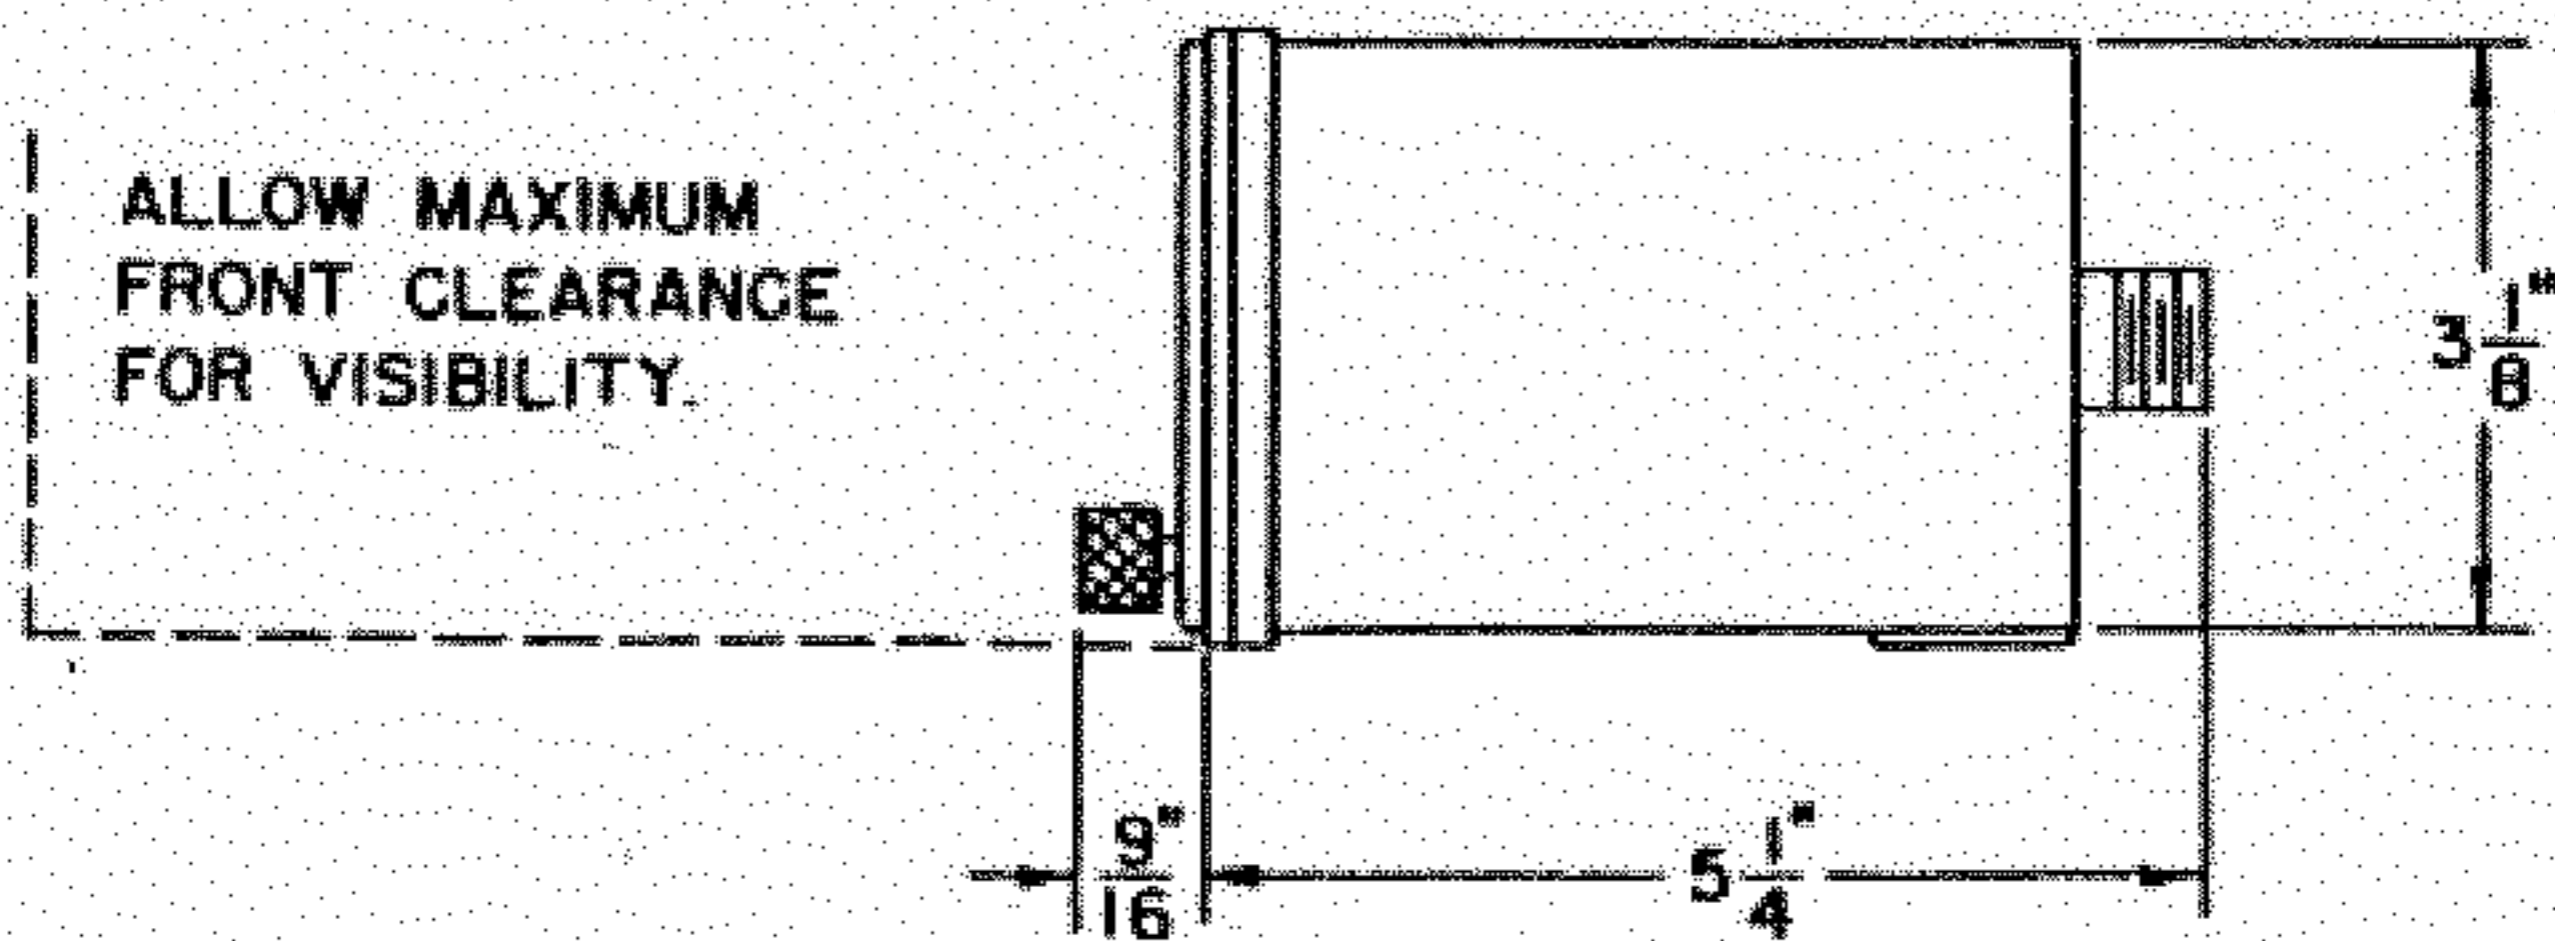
B. Control Panel C-758/A, Outline Drawing
